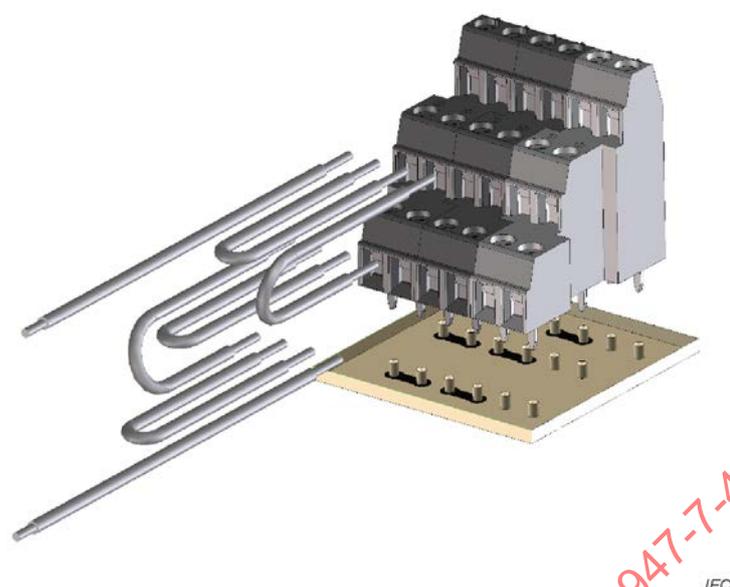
Example of wiring structure of a multi-tier PCB terminal block
